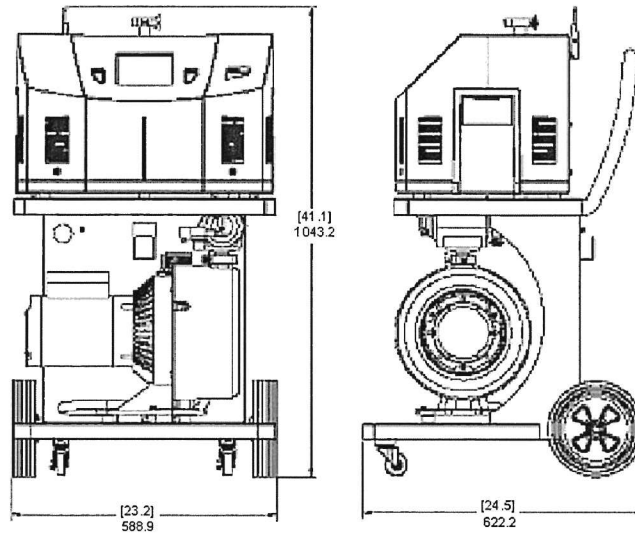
Mobile Leak Detector with External TS620 Dry Scroll Pump on a Cart, Model VS MD30+, Dimensions
